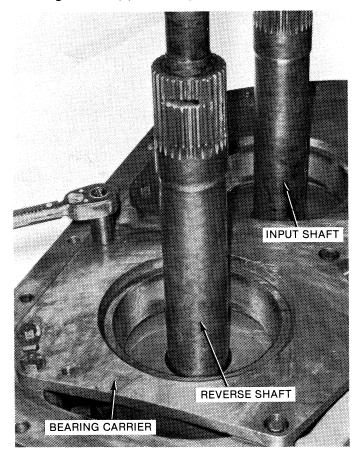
Removing or Installing Screws on Bearing Carrier.
